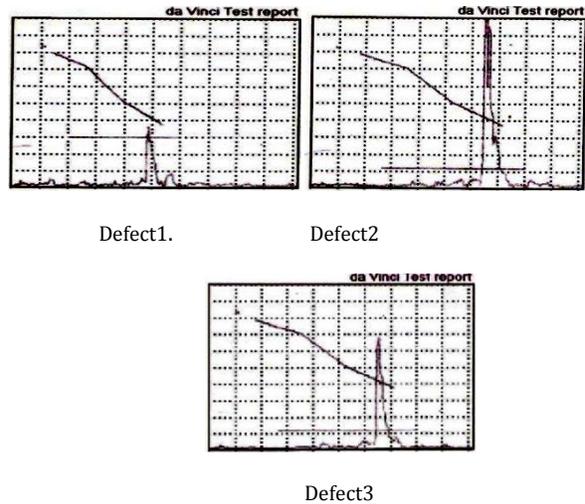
Ultrasonic Defectogram of welded HE15 material Defect1: SD=19mm, BP=25mm, Depth (d) =2mm, Defect2: SD=25mm, BP=22mm, Depth (d) =4mm, Defect3: SD=22mm, BP=23mm, Depth (d) =3.5mm
